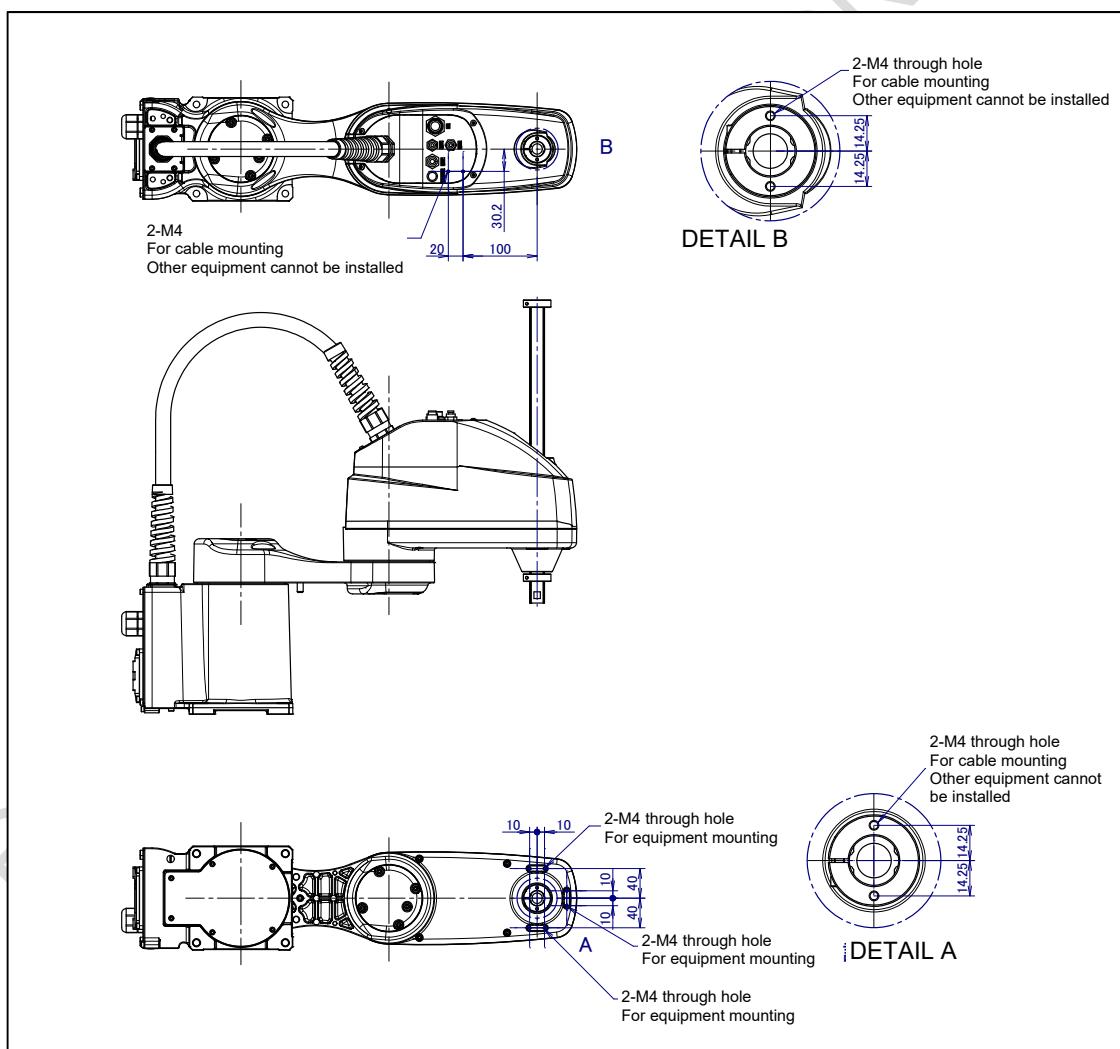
(a) Equipment mounting faces (SR-3iA, SR-3iA/H)
